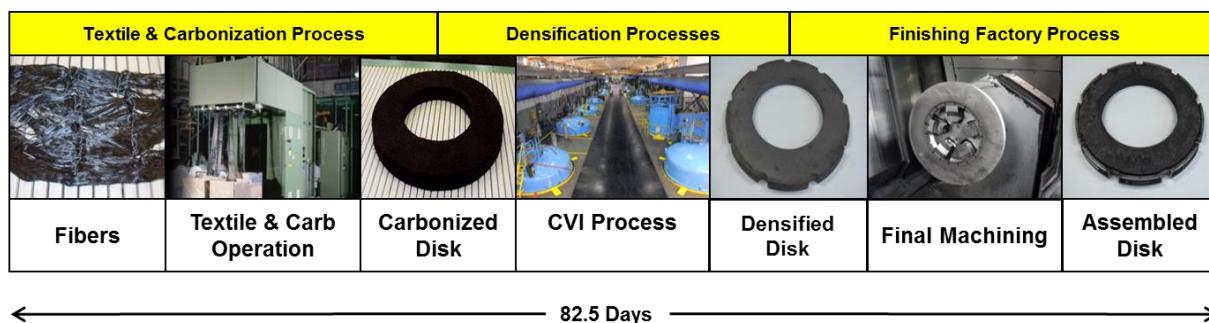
The Goodrich Carbon Brake Manufacturing Process
